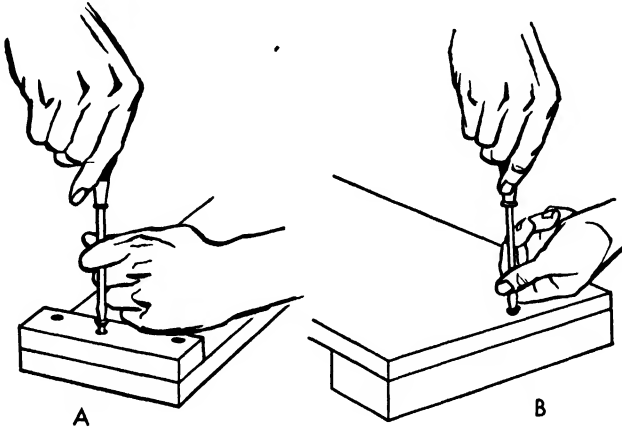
Two good methods of using a screw driver. While the right hand gets a new grip on the handle for the next turn, the left hand holds the bit steady and keeps it in the screw slot.
